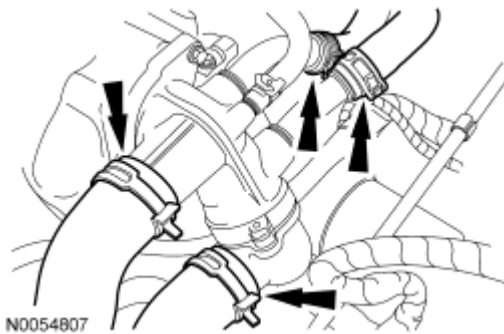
Locating Upper Radiator Hose, Lower Radiator Hose & Heater Hoses From Thermostat Housing
